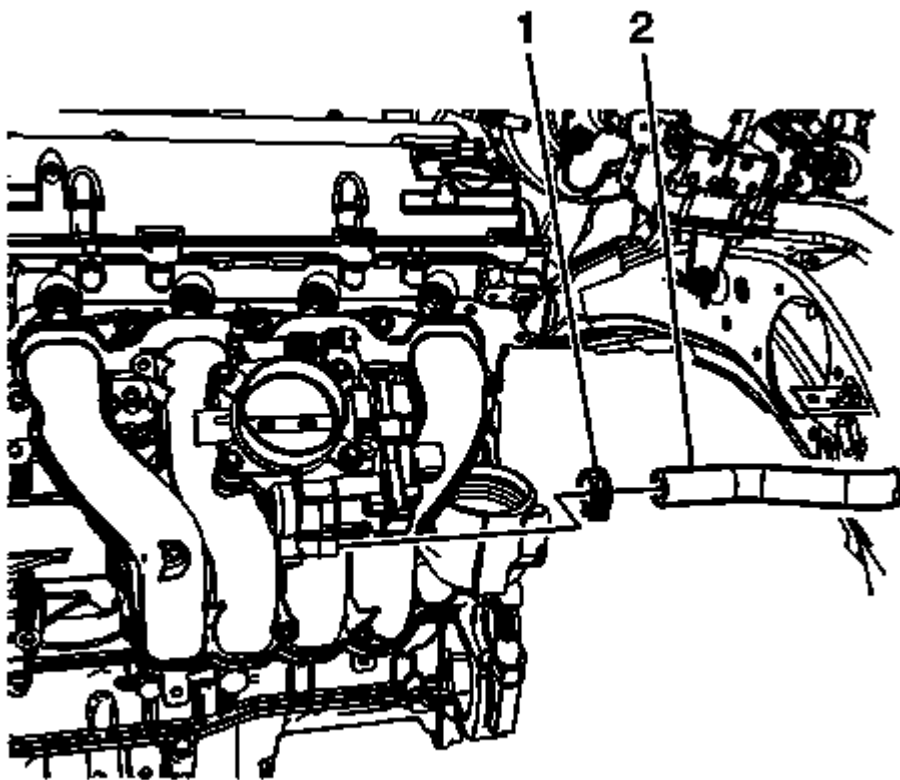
Clamp And Power Brake Booster Vacuum Pipe
